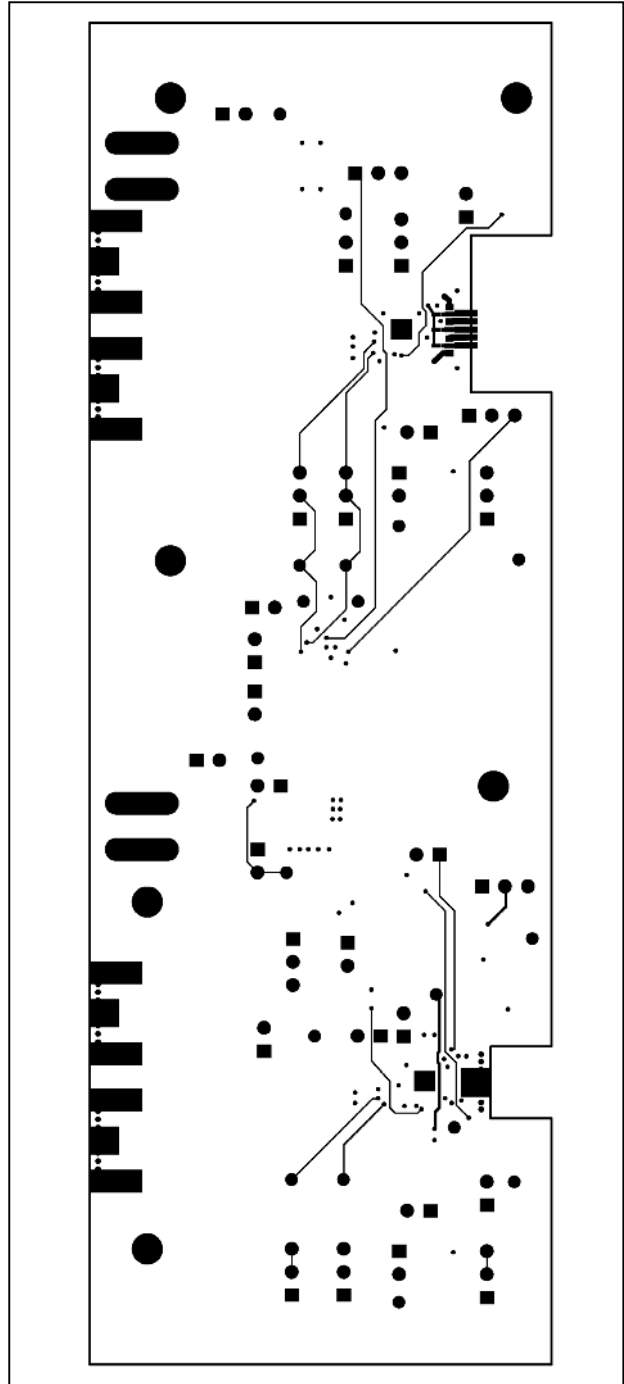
MAX3735A EV Kit PC Board Layout—Solder Side
